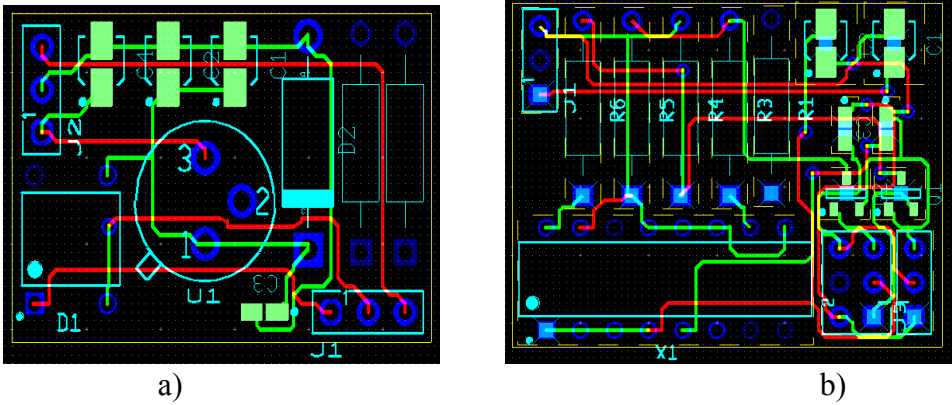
a) information processing PCB trace, b) inverter PCB trace
